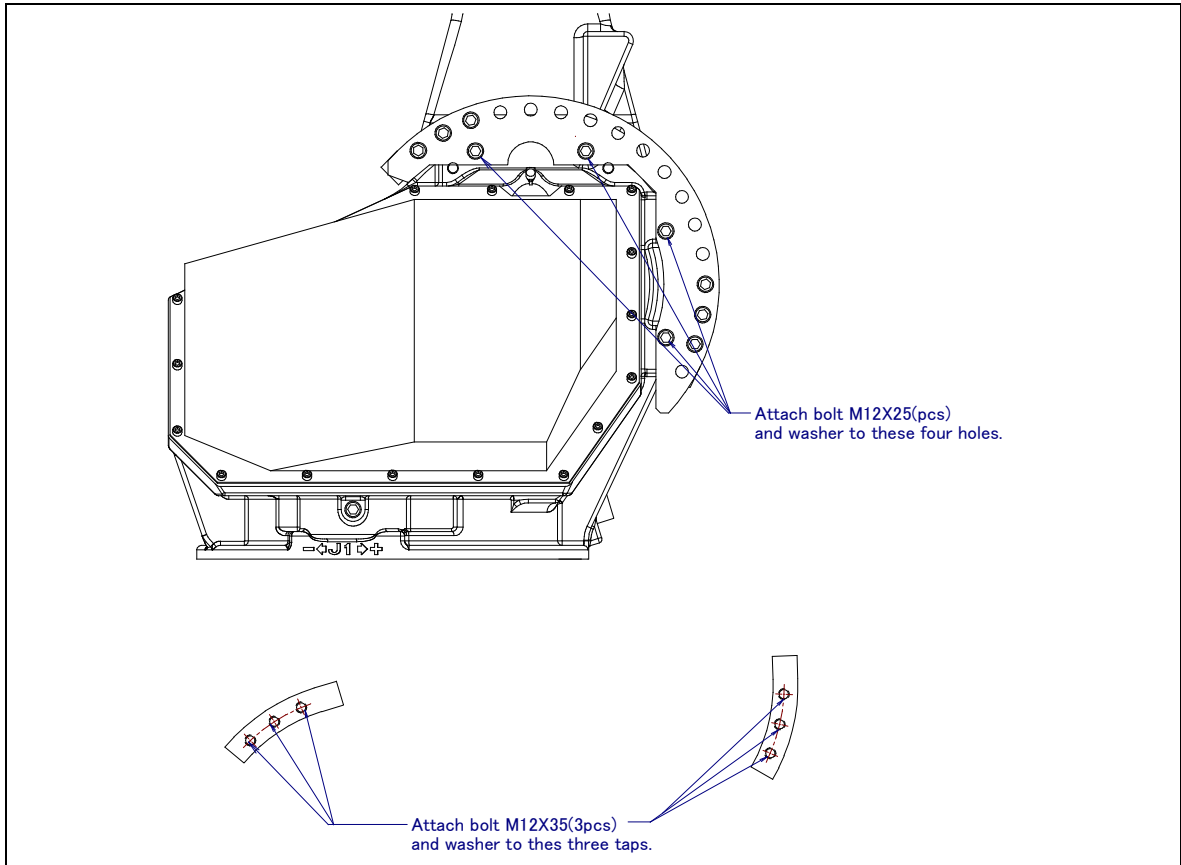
(b) J2-Axis movable mechanical stopper (M-710iC/50/70/50H/50E/45M)
